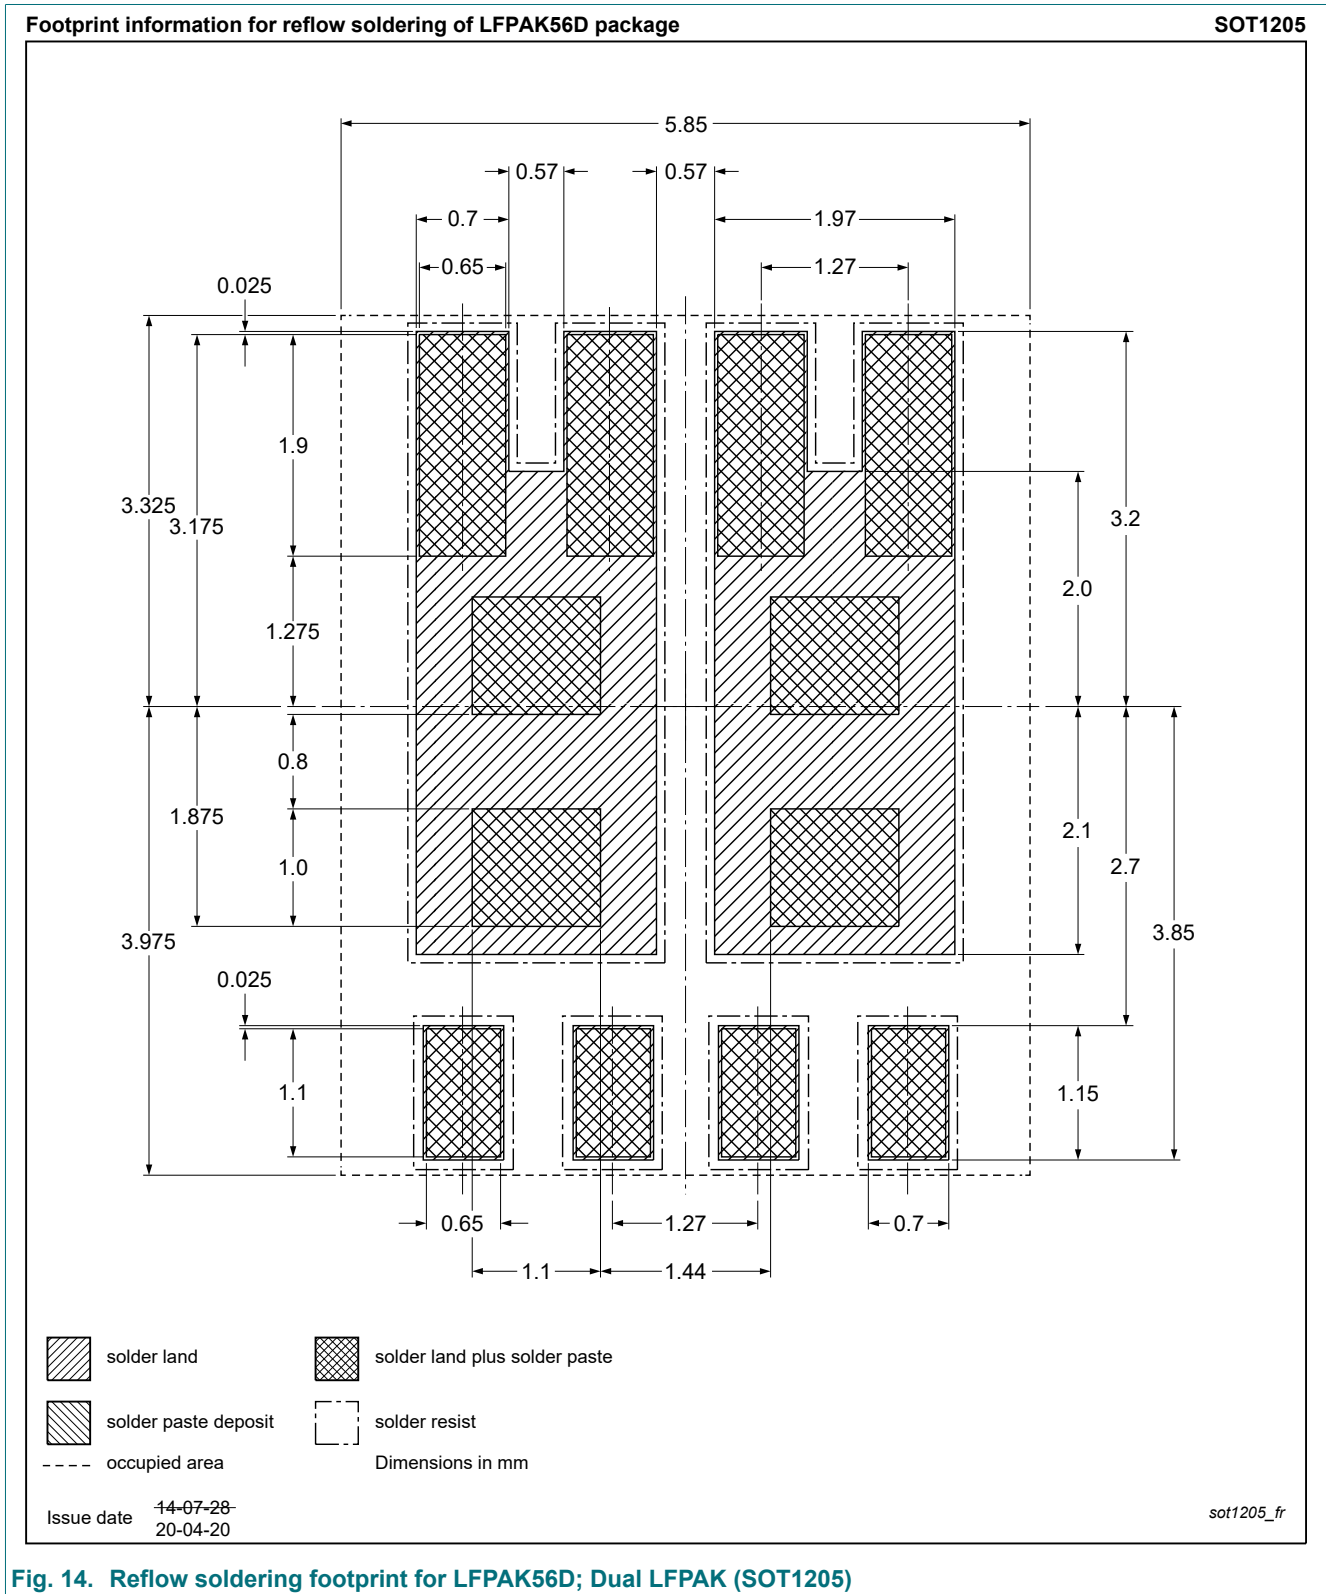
Reflow soldering footprint for LPAK56D; Dual LPAK (SOT1205)
